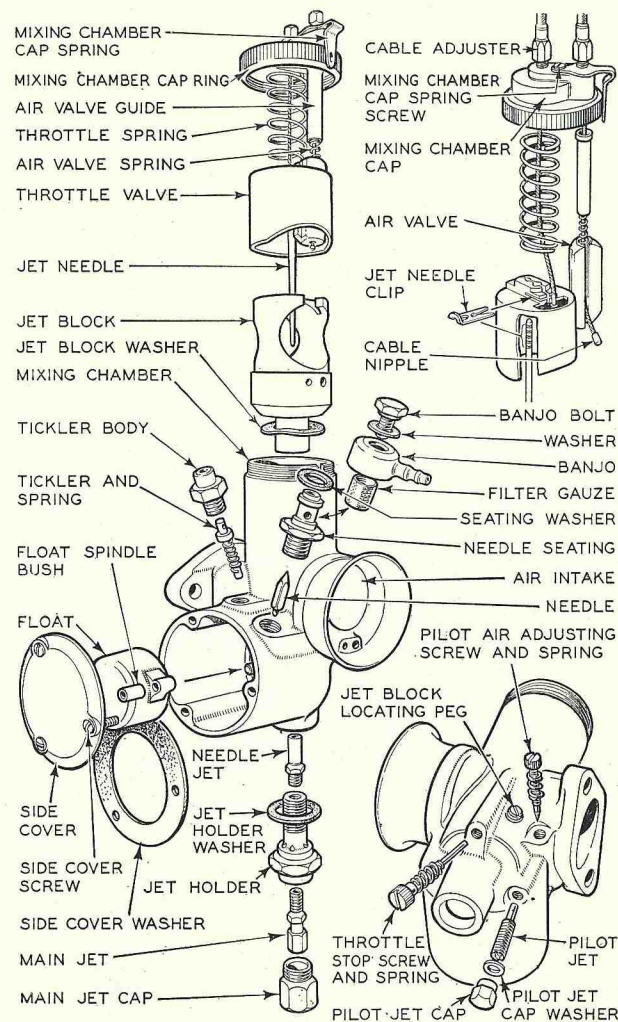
EXPLODED VIEW OF THE AMAL "MONOBLOC" CARBURETTER FITTED TO THE 1955-59 MODELS, EXCEPT 4-CYLINDER AND 1960 LEADER AND ARROW 250.
